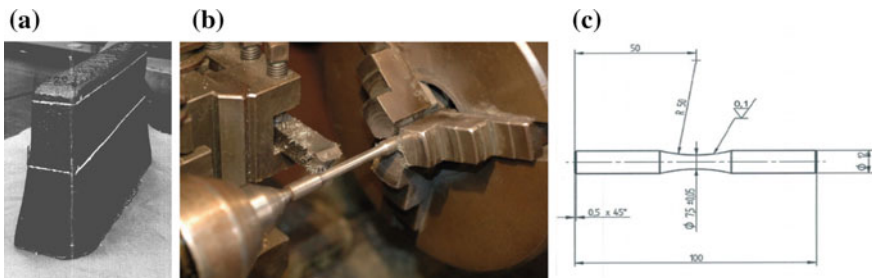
Production of standardized specimens for rotating bending fatigue tests (ISO 1143): a metallic block from sand casting; b tool machining; c ‘dog-bone’ shape
